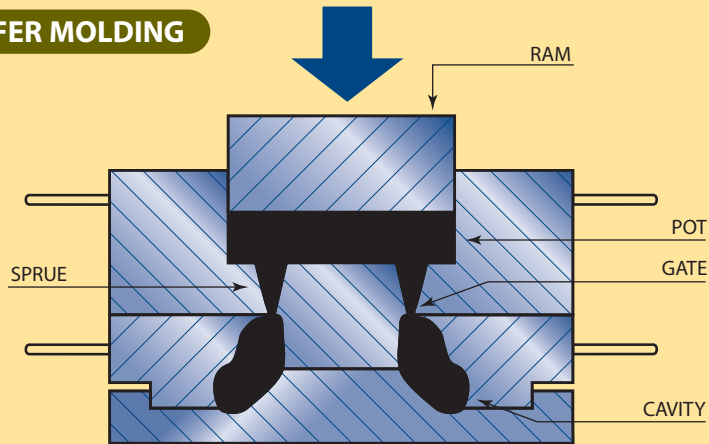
Transfer molding utilizes a closed mold accessed through a gate.
